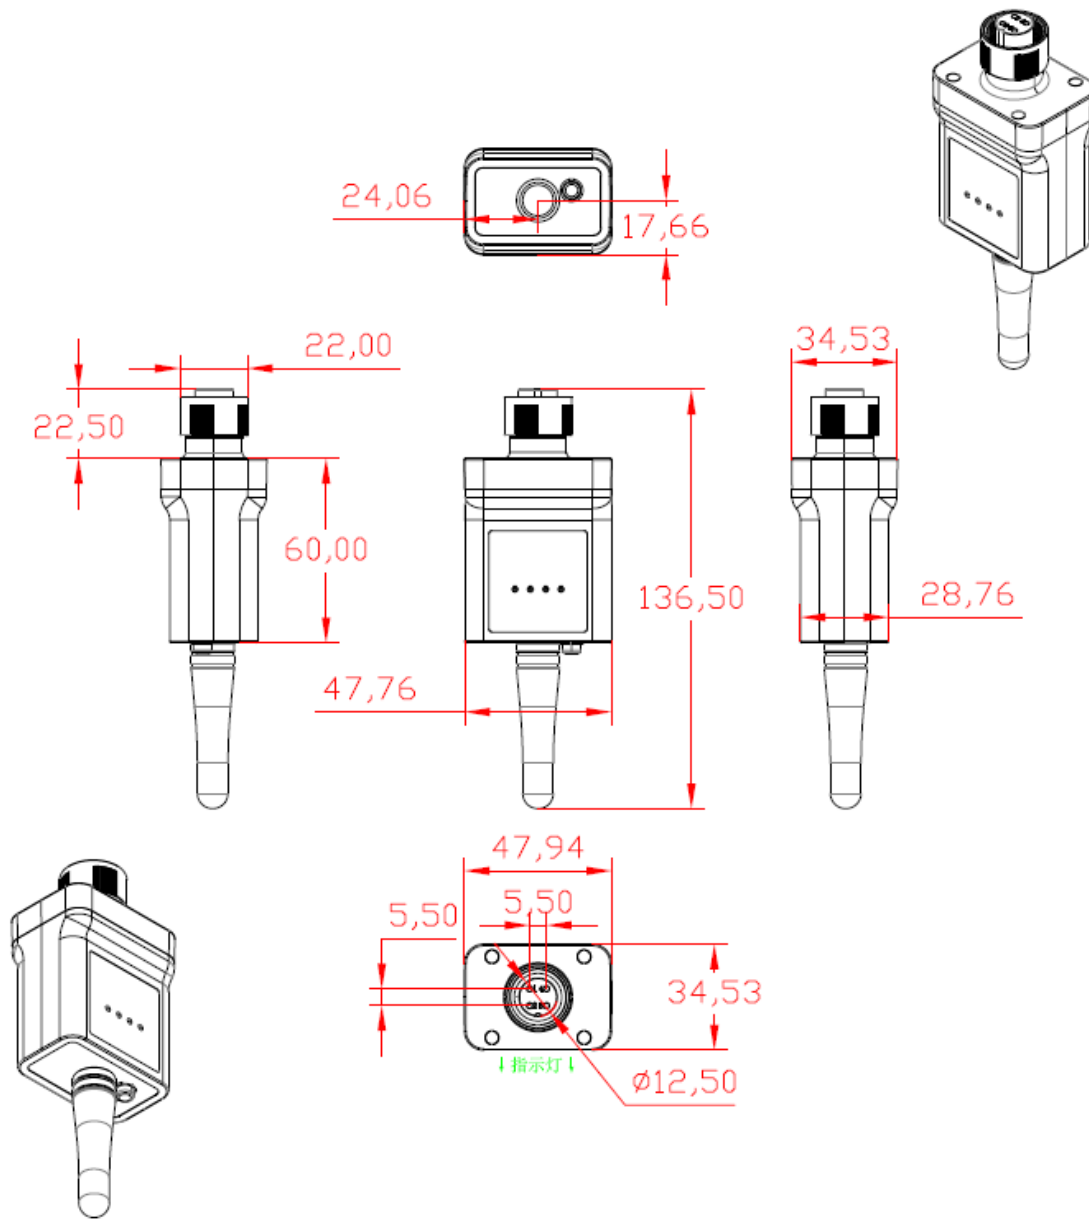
Solar Plug-SWB1-20 Mechanical Dimensions
